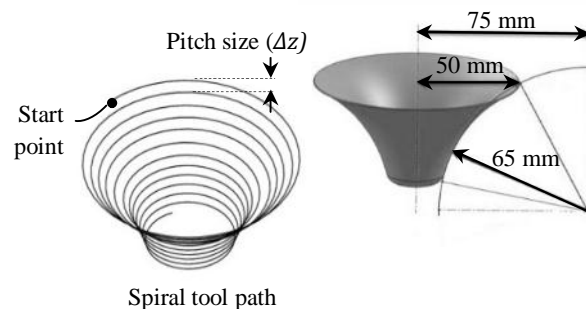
Geometry and dimensions of workpiece and tool path used in experiments
